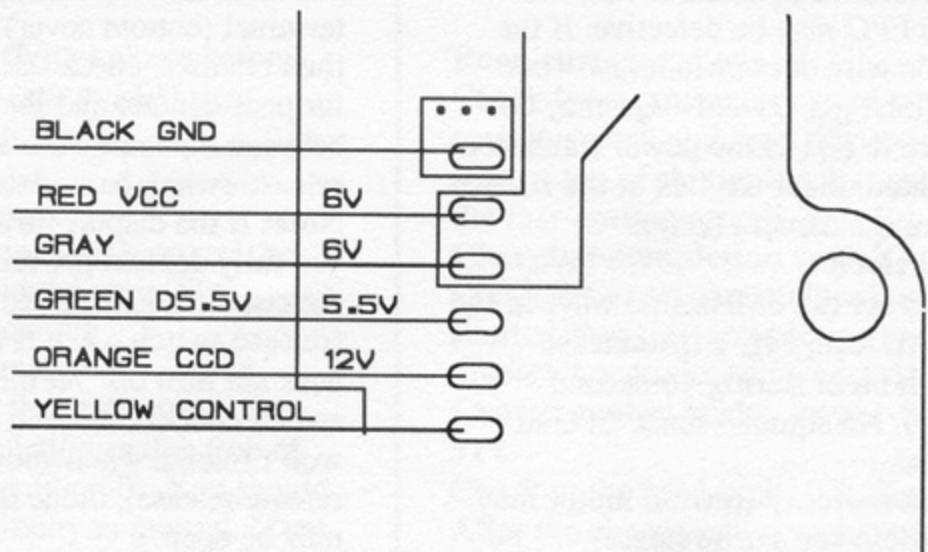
FRONT OF MAIN FPC, MIRROR BOX REMOVED
